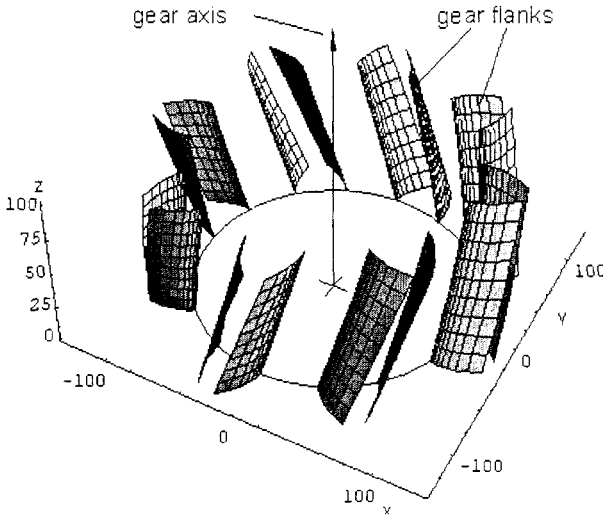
Substitute model of the whole gear consisting of 2 z substitute gear flanks
